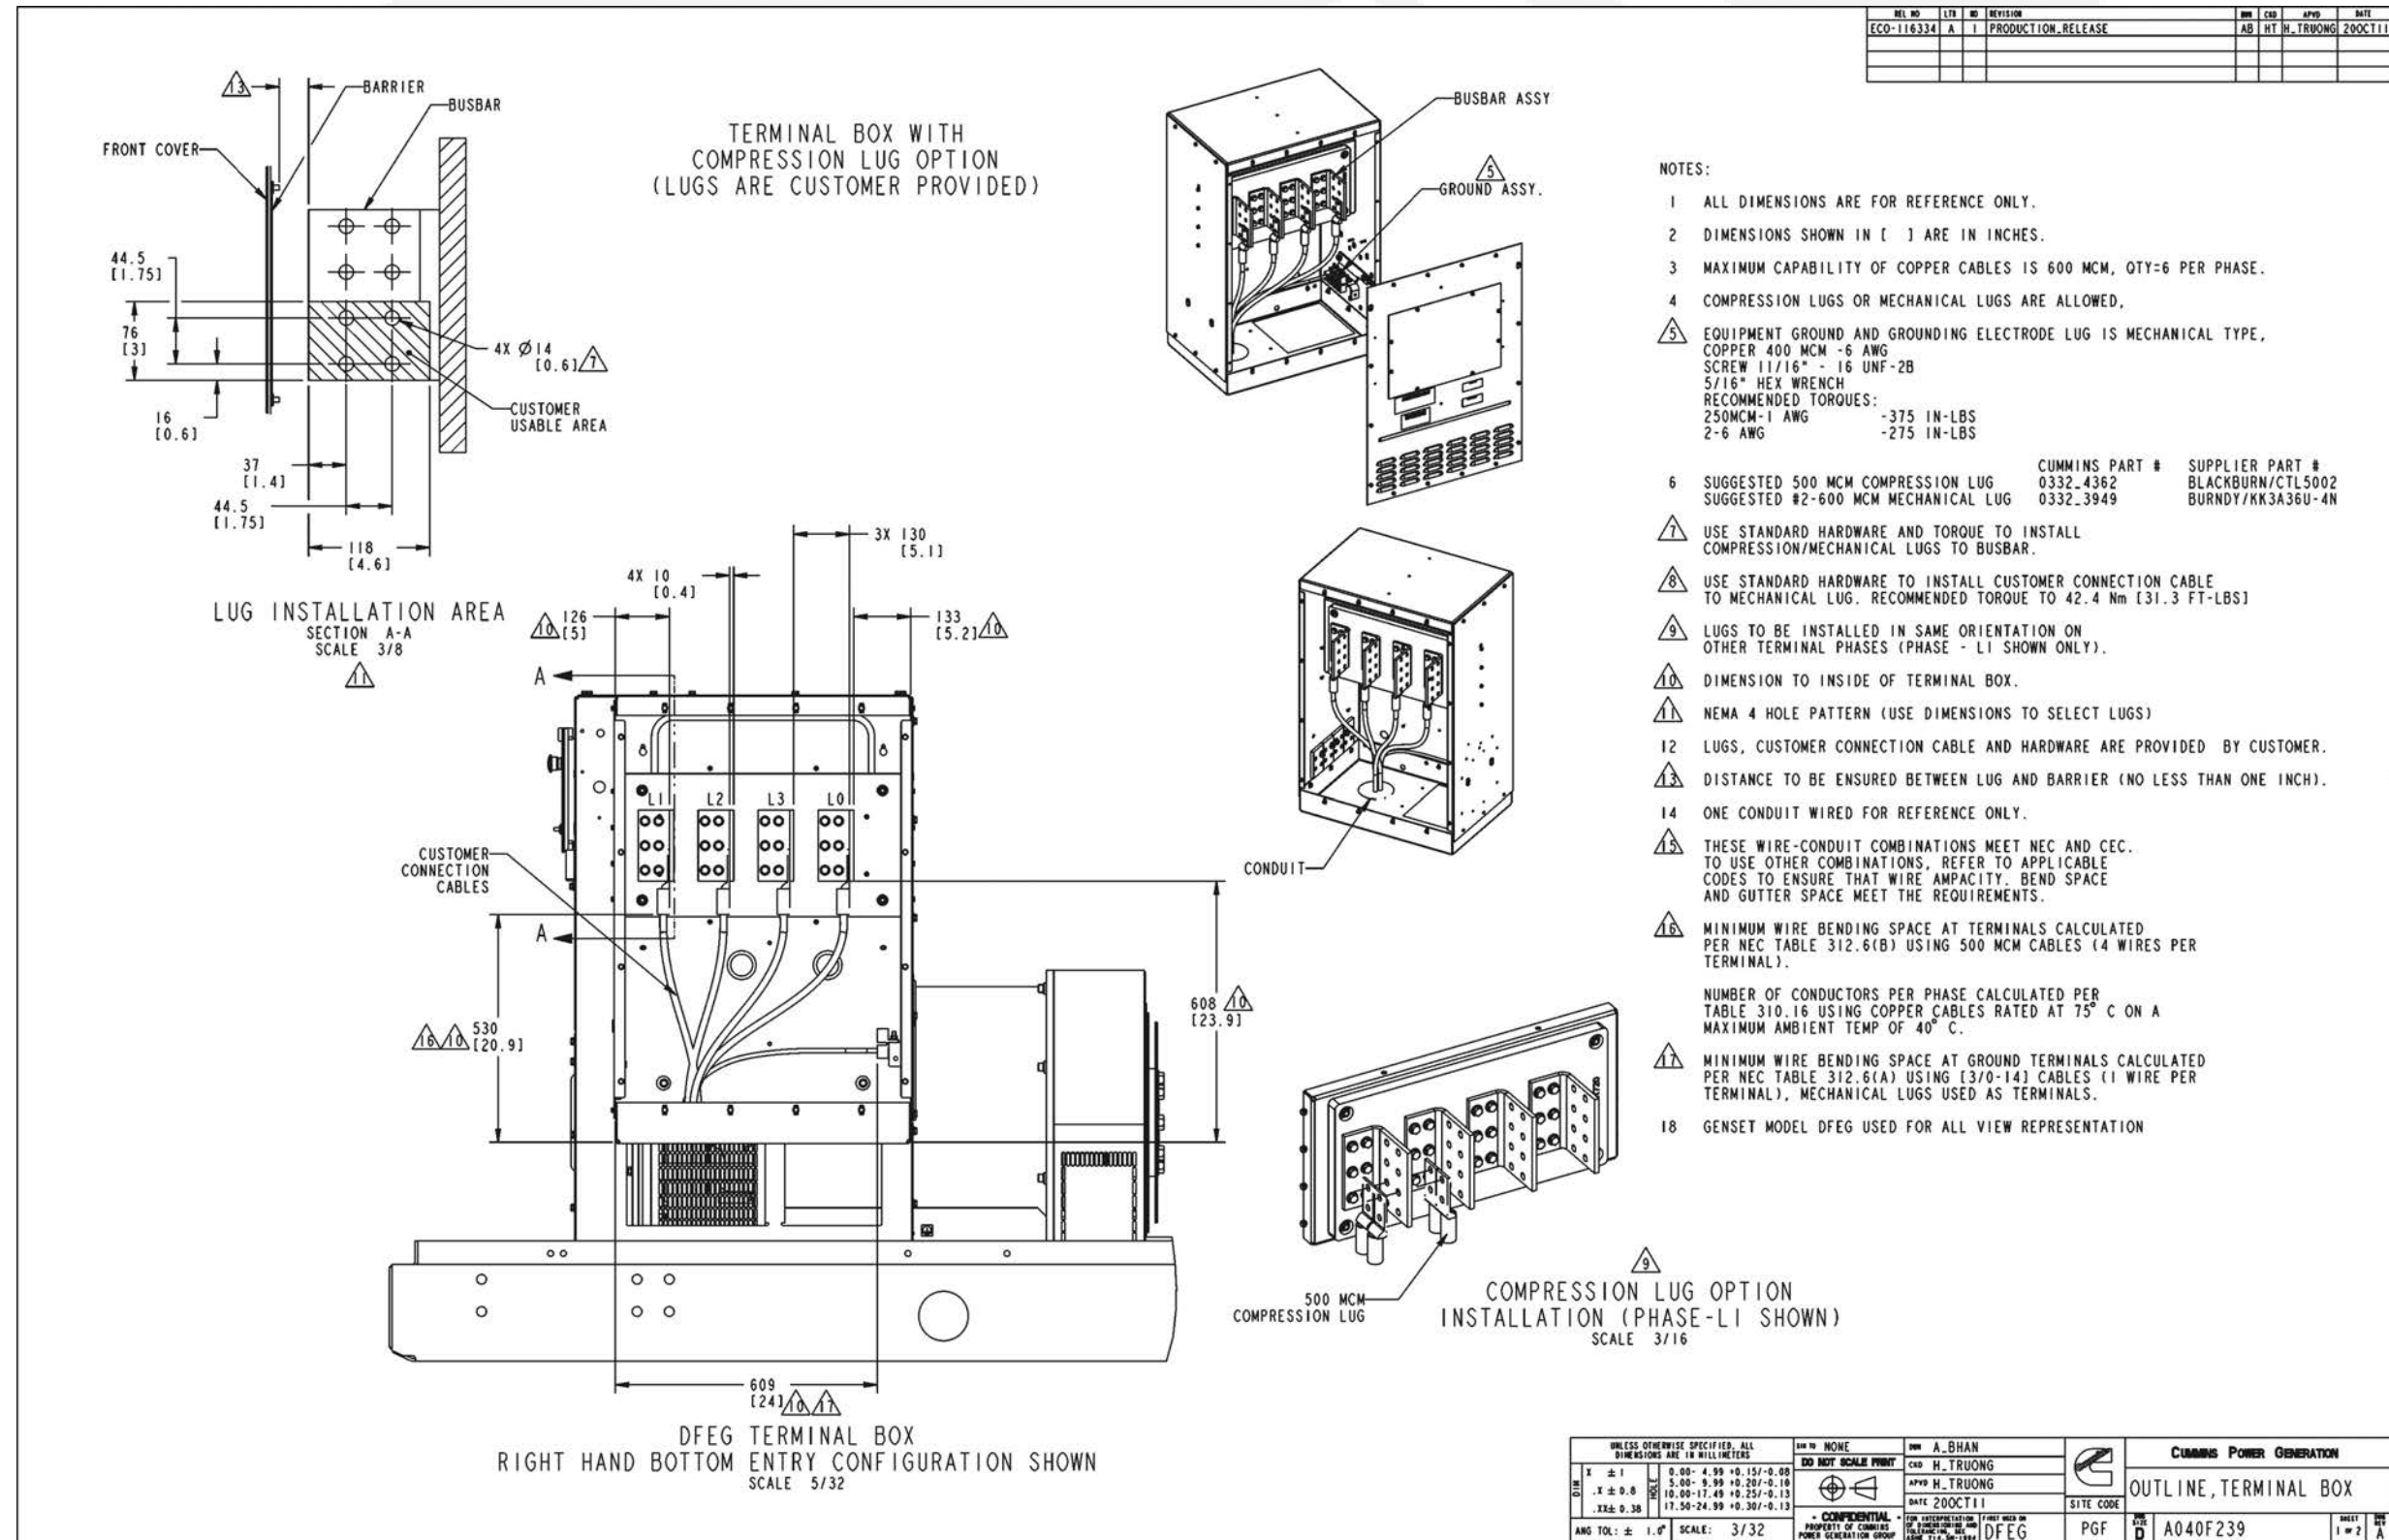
BREAKERLESS CONDUCTOR TERMINAL BOX OUTLINE DRAWING (SHEET 1)
